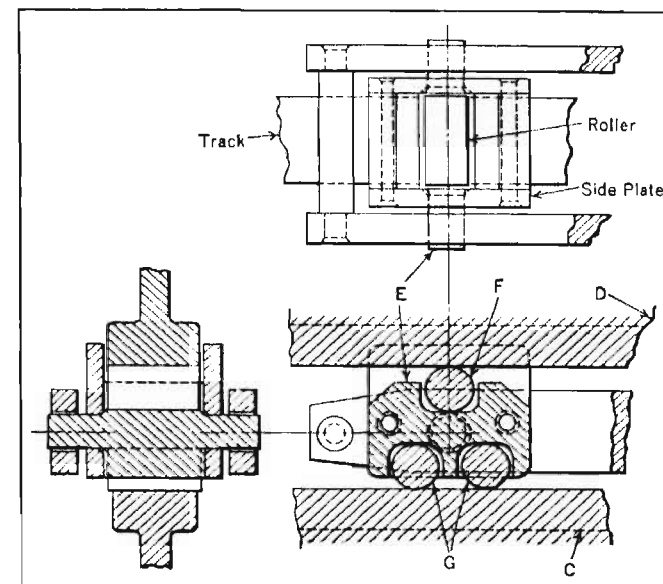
Roller Bearing Block Used in Place of Solid Contact Block *A*, Fig. 12, when Lever *D* is Heavily Loaded
